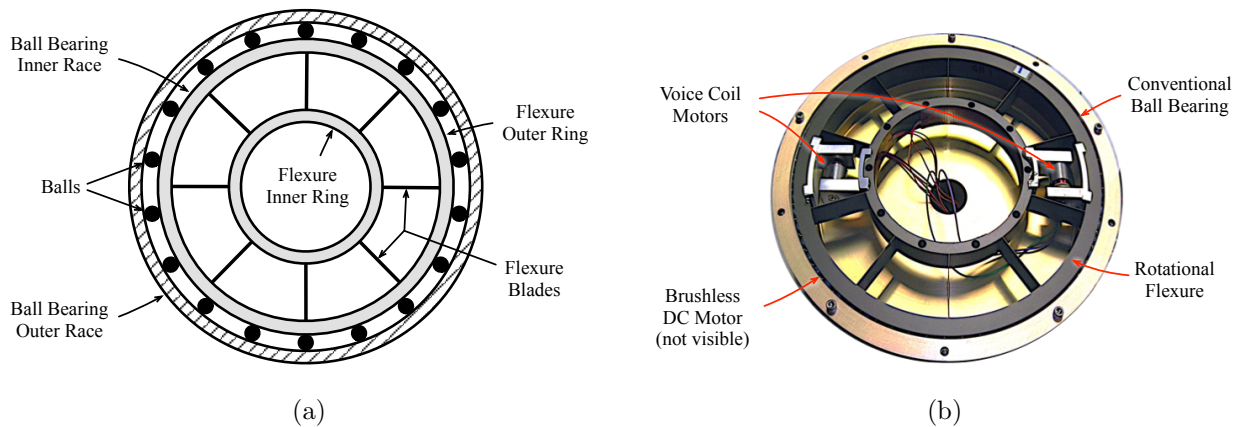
Hybrid flexure bearing: (a) concept diagram and (b) prototype hardware
